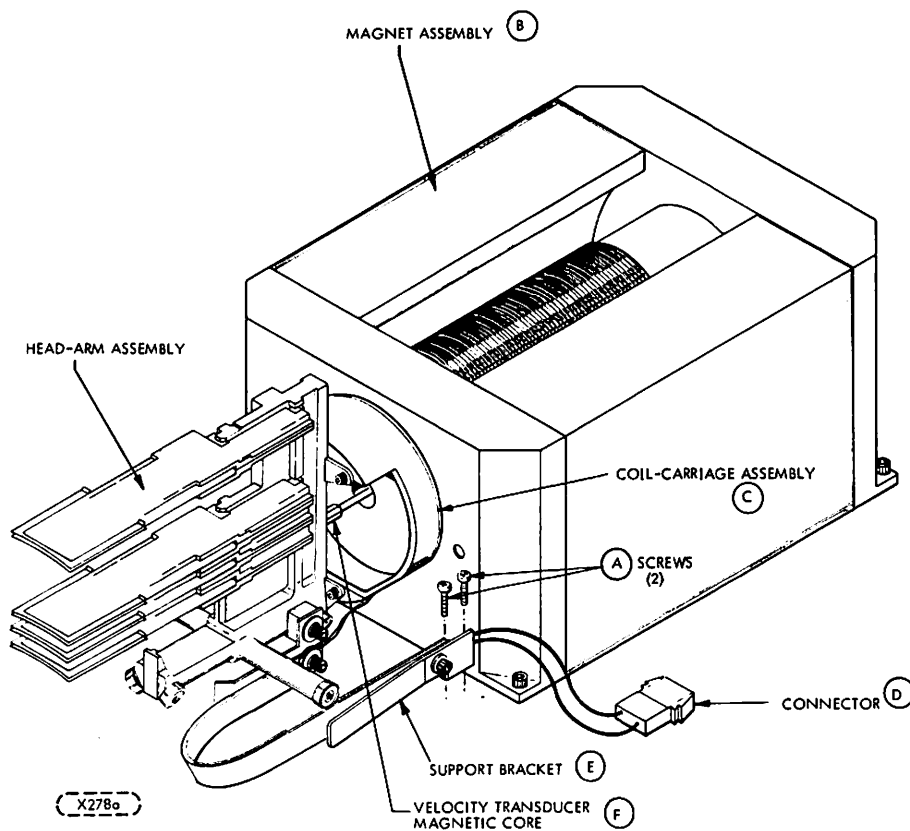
ACTUATOR ELEMENTS (POWER AMPLIFIER REMOVED)
